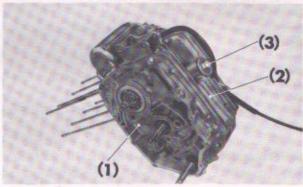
(1) Upper crankcase (2) Lower crankcase (3) Drain plug
